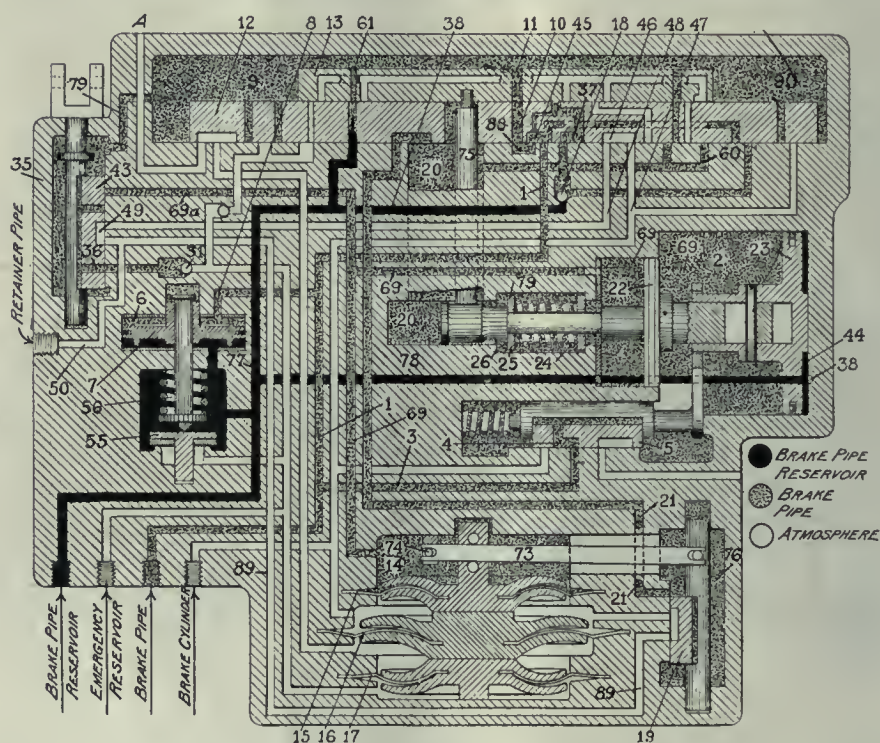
FULL RELEASE POSITION—BRAKE PIPE RESERVOIR CHARGING TRIPLE VALVE IN QUICK RELEASE
